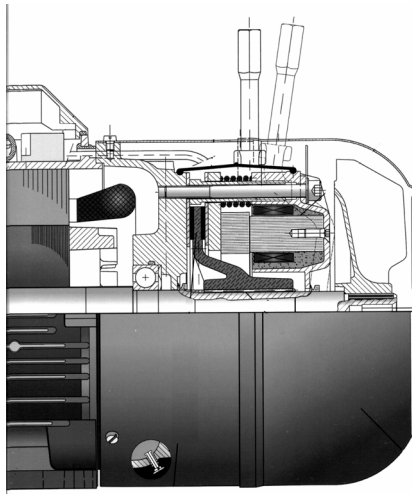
Induction motor with integrated electromagnetic brake (source: ABB)
